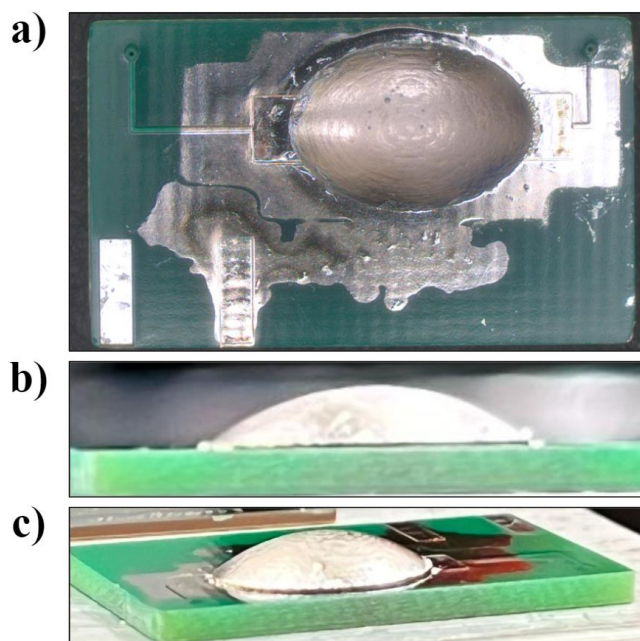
(a) Top view, (b) left side view, and (c) right side view of a silver coated ellipsoid test structure.
